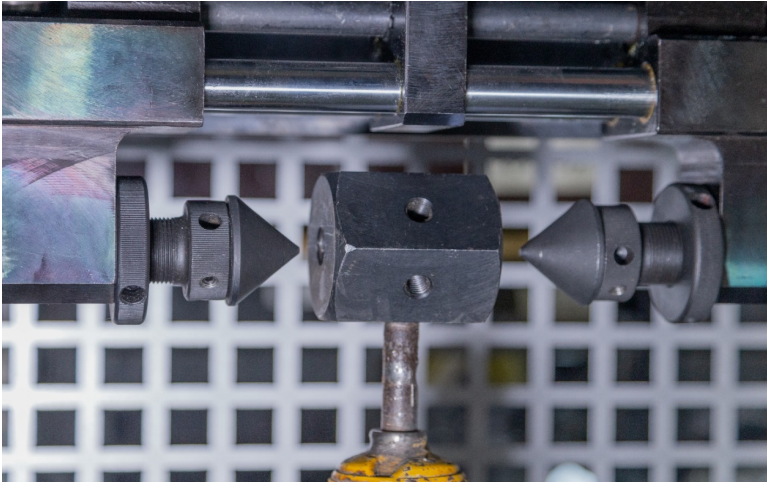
Replacement of the shock absorber fixation in the lower pneumatic clamp.
